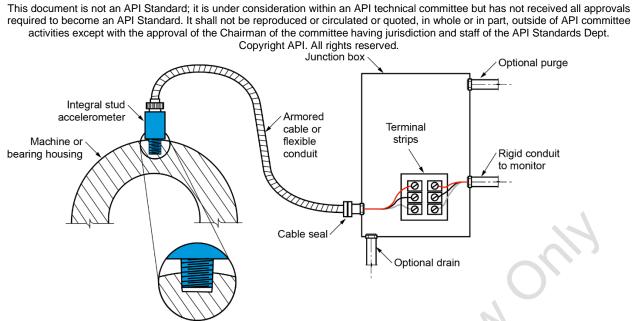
Typical Nonflush-mounted Arrangement Details for Integral Stud Accelerometer
